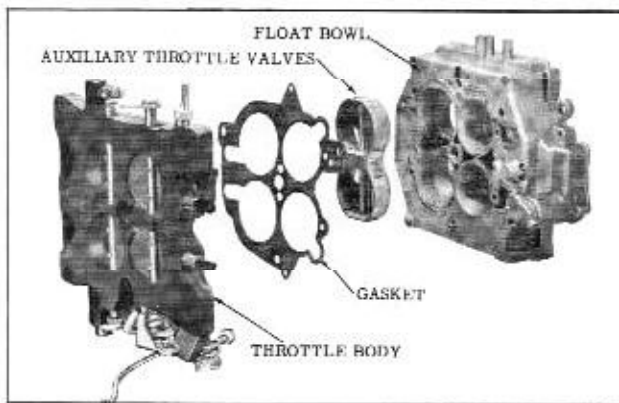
Throttle Body and Auxilliary Throttle Valves
